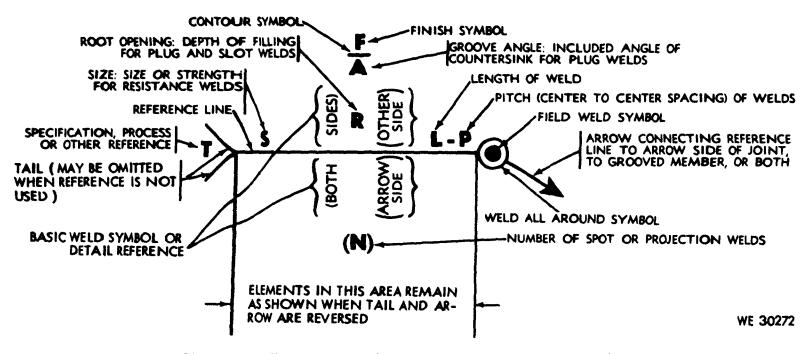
Standard locations of elements on a welding symbol.
